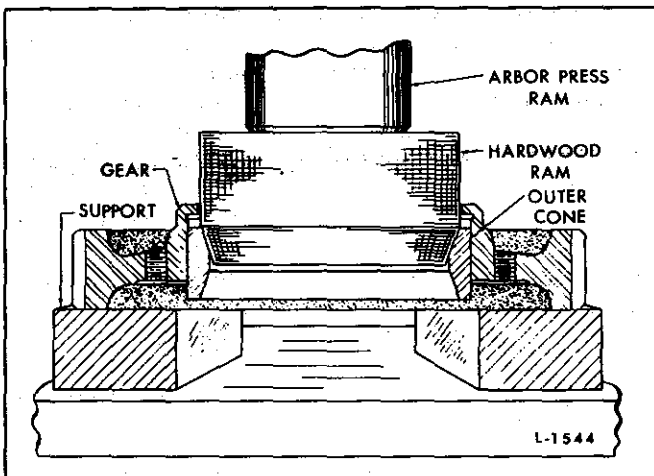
Hardwood Ram for Pressing Outer Bearing Race from Gear
